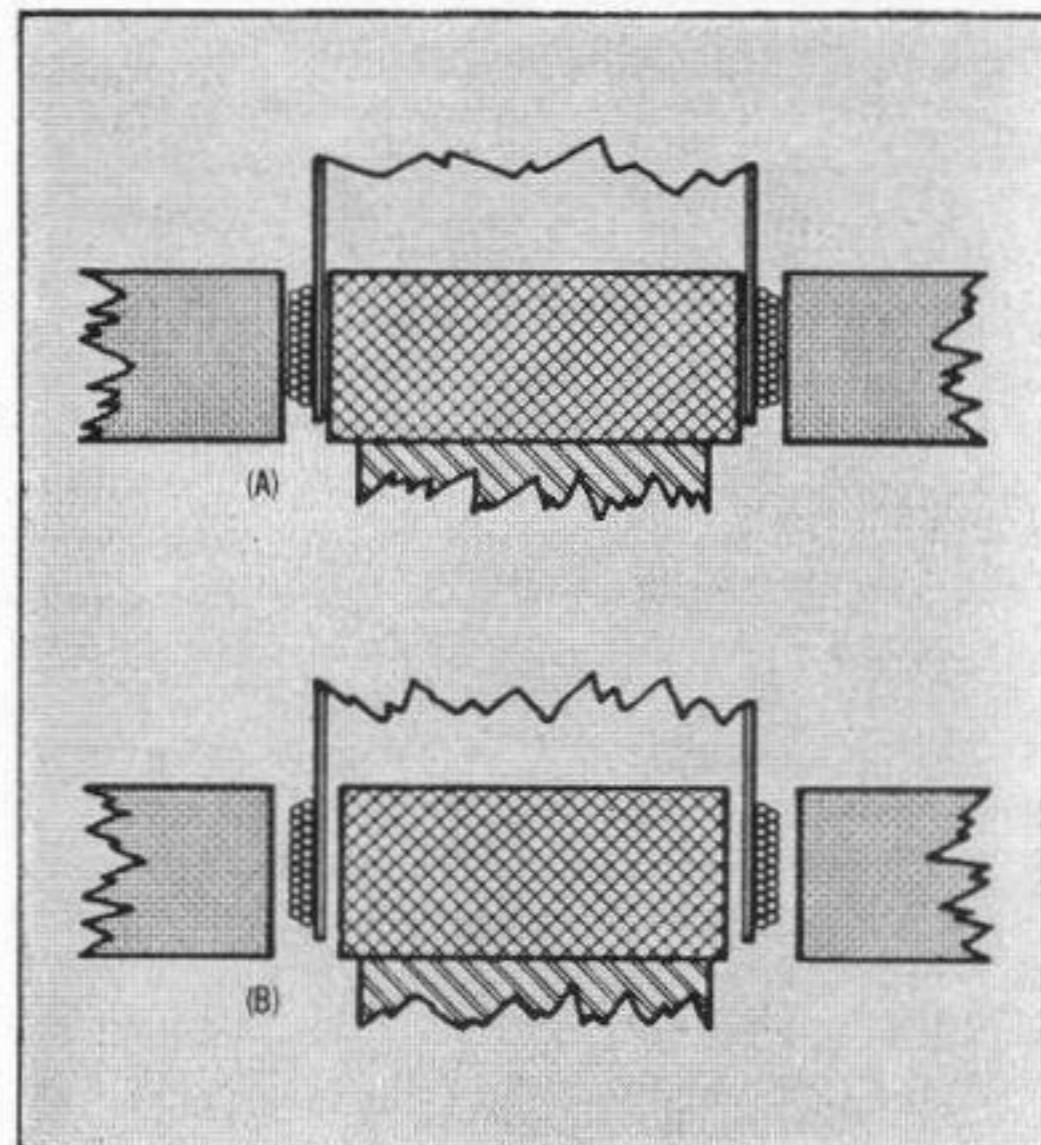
Cross-section of the speaker voice-coil air gap. A close-tolerance gap requiring precision assembly is shown in (A). The wider gap shown at (B) requires less care in its assembly.
